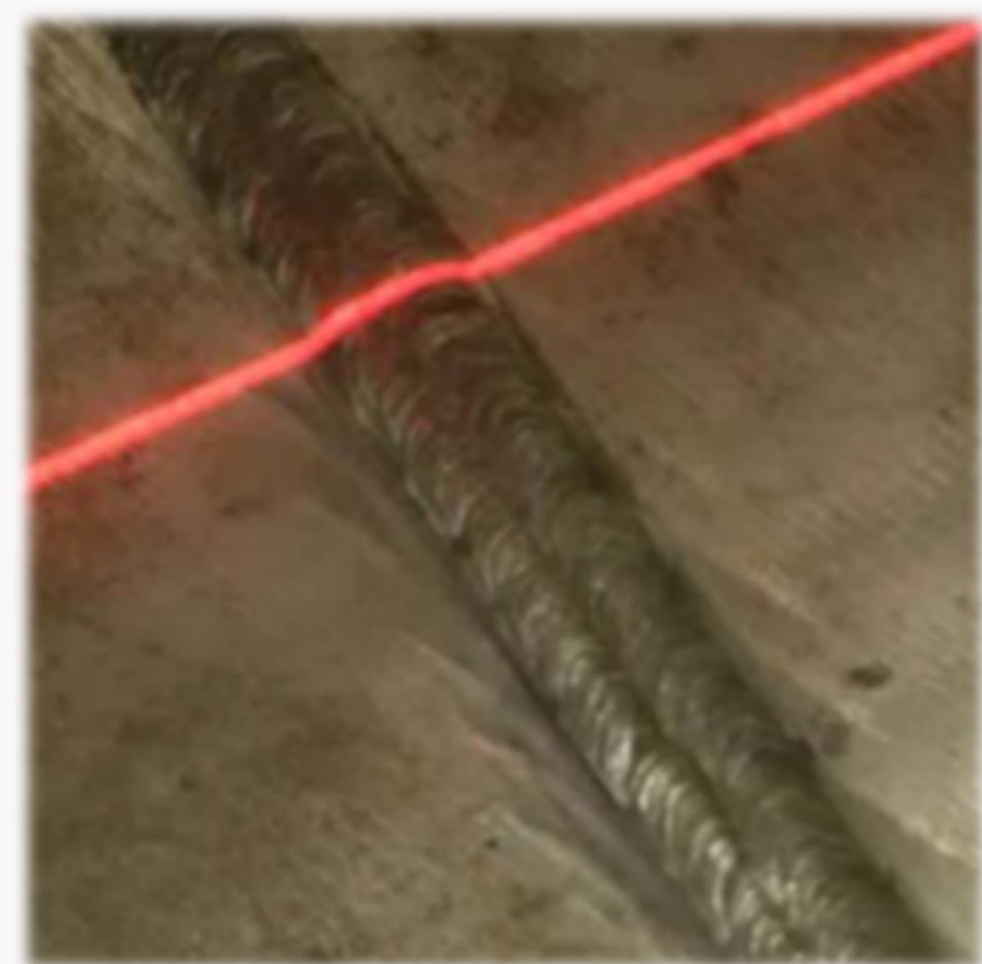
Laser profilometer weld center tracking and visual inspection.
